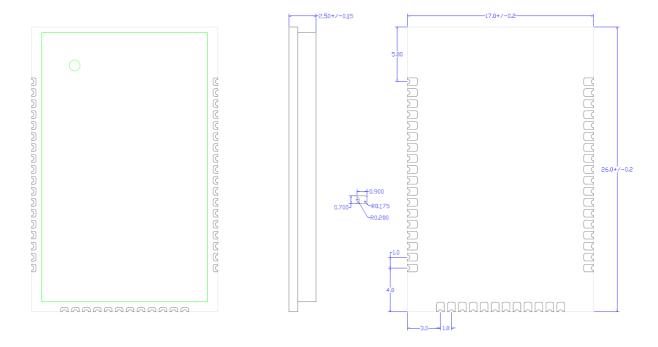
Outer Dimensions of the LOM102A00 (top view)
